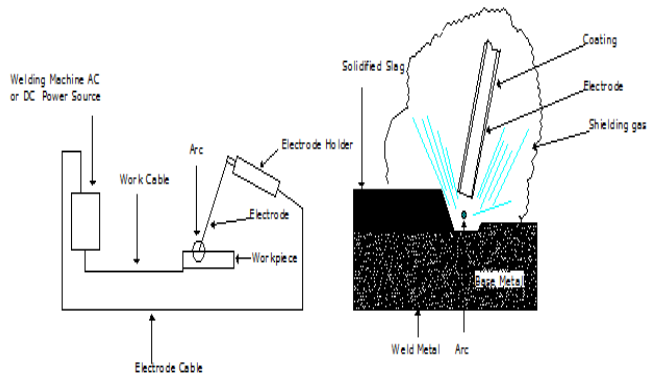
Schematic Illustration of the Shielded Metal Arc Welding Process[1]
